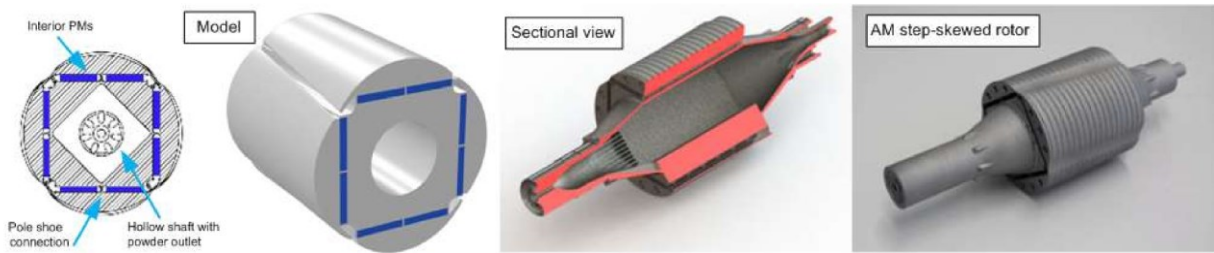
Additive Manufacturing Interior Magnet-Skewed Rotor for PM Synchronous Machine with Hollow Shaft and Lightweight Construction [82]
